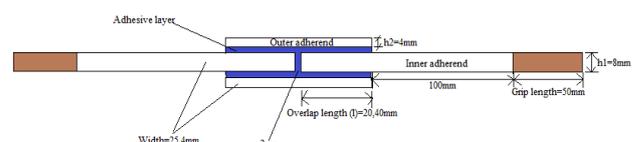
Specimen details and pictorial diagram of double-strap joint specimens.
